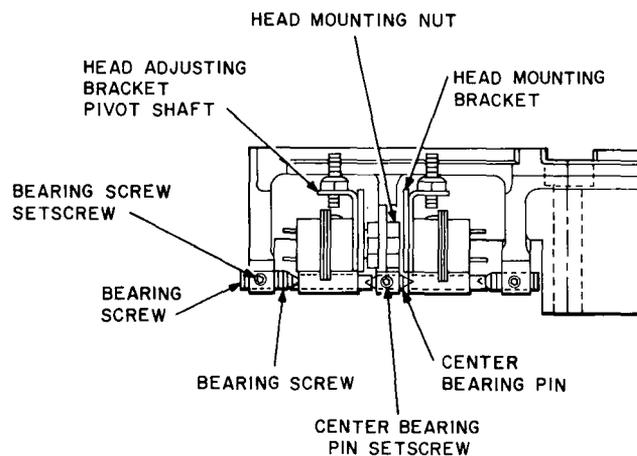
KS-12068 L4, L5, and L6 Recorder-Reproducers — Record and Erase Head Bearings and Associated Parts
